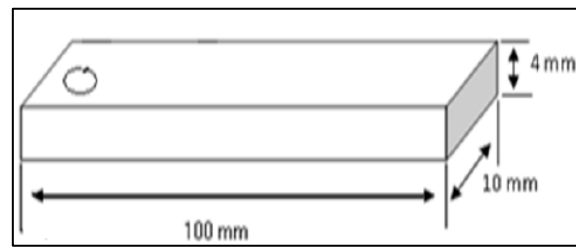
The dimensions of the printed samples of carbon fiber for fatigue testing.
